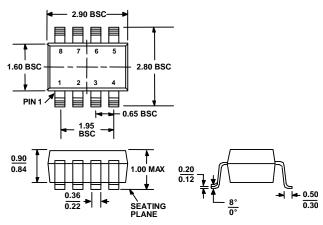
8-Lead Small Outline Transistor Package [Thin SOT-23] (UJ-8) Dimensions shown in millimeters
